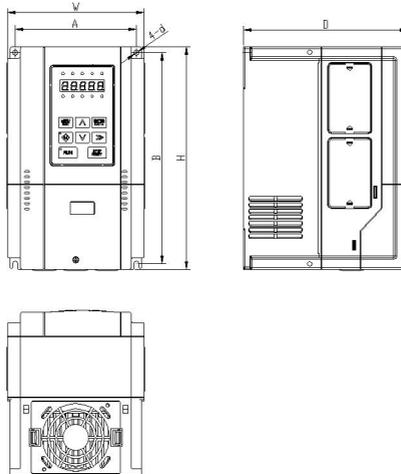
Outline, mounting dimensions for MV600J6B-4T5.5~MV600J6B-4T30
